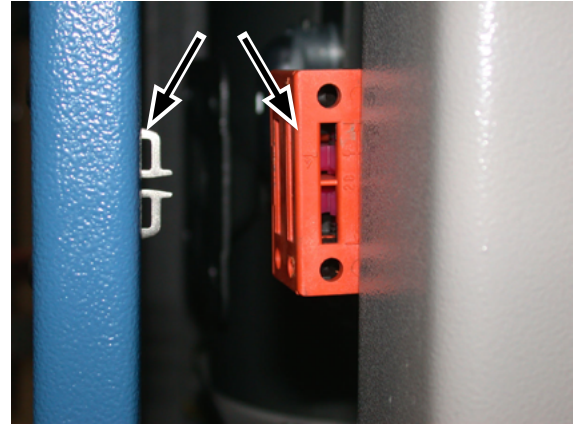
Each endframe door and the front access guard has a safety interlock switch.
